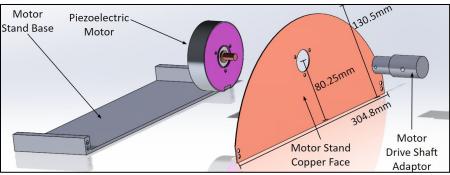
CAD Model of Motor Stand and Driveshaft Adapter
